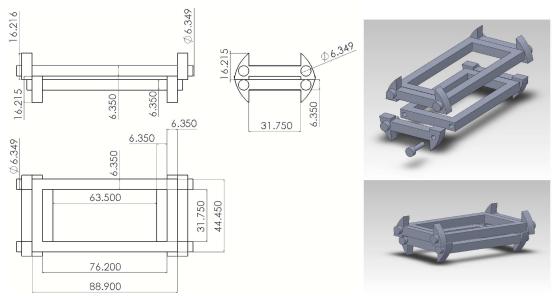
(Left)* Dimensions (in mm) for all-graphite tensioning frame; *(upper right)* exploded view of tensioning frame components showing attachment of "horned bumpers" with threaded graphite screws; *(lower right)* assembled tensioning frame.
